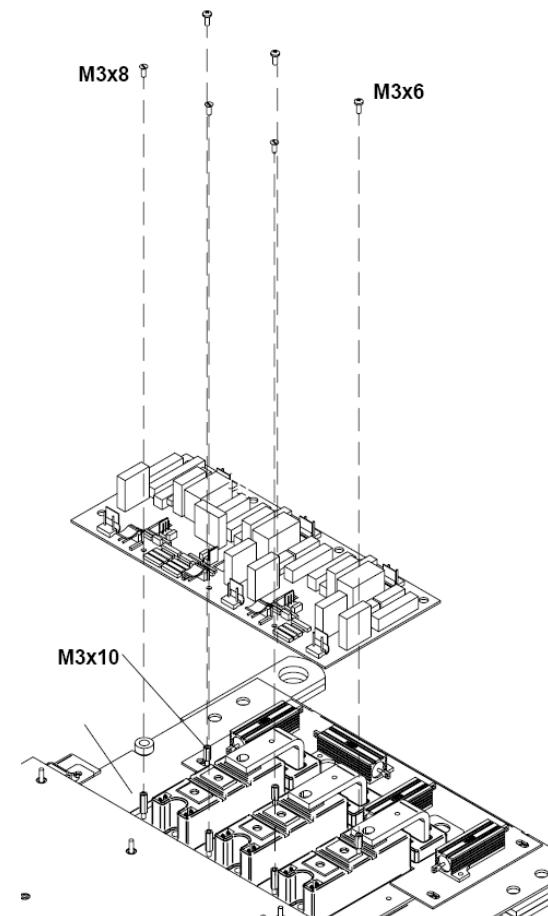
(c) Disassembly of the Snubber, Trigger and Soft charge protection
